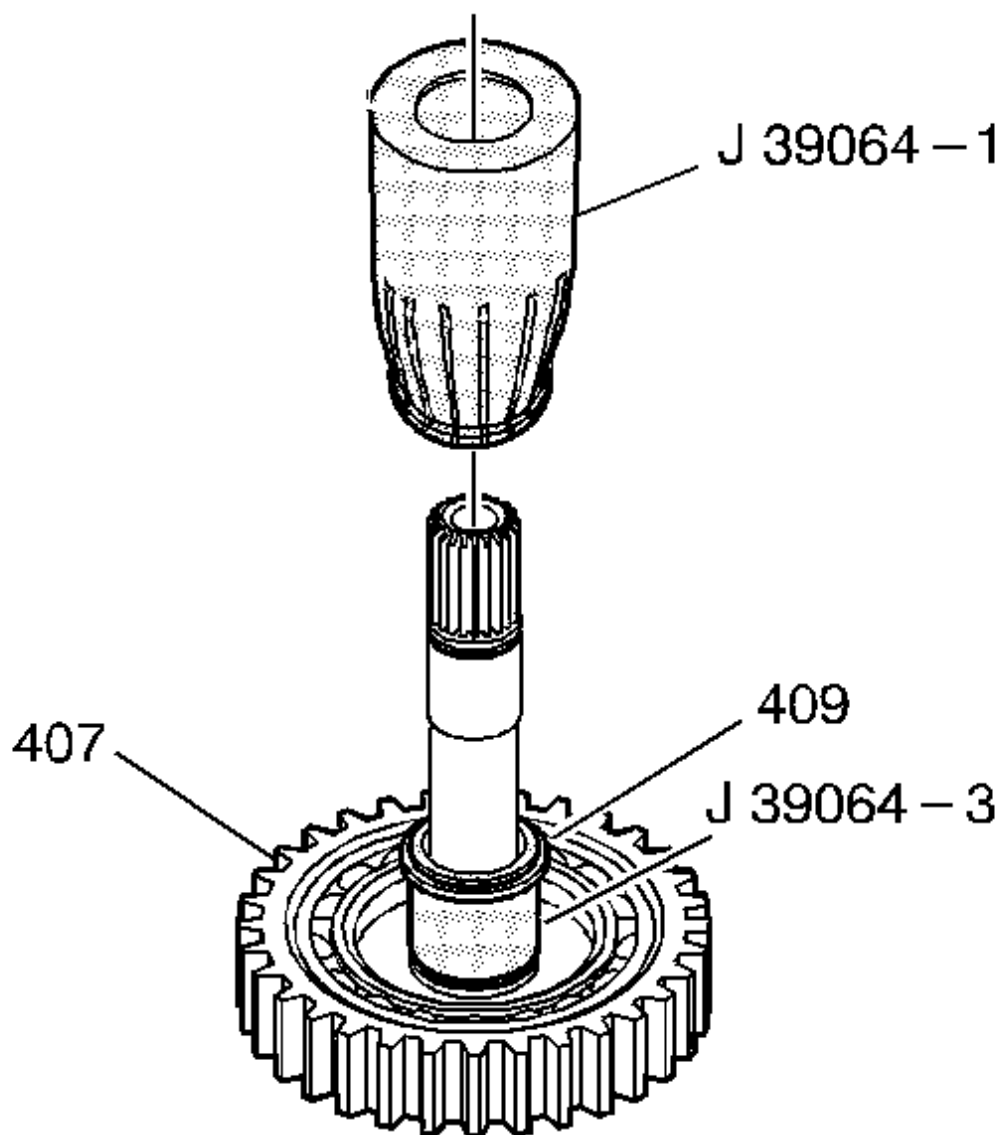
Drive Sprocket Oil Seal Ring & Seal Protector
